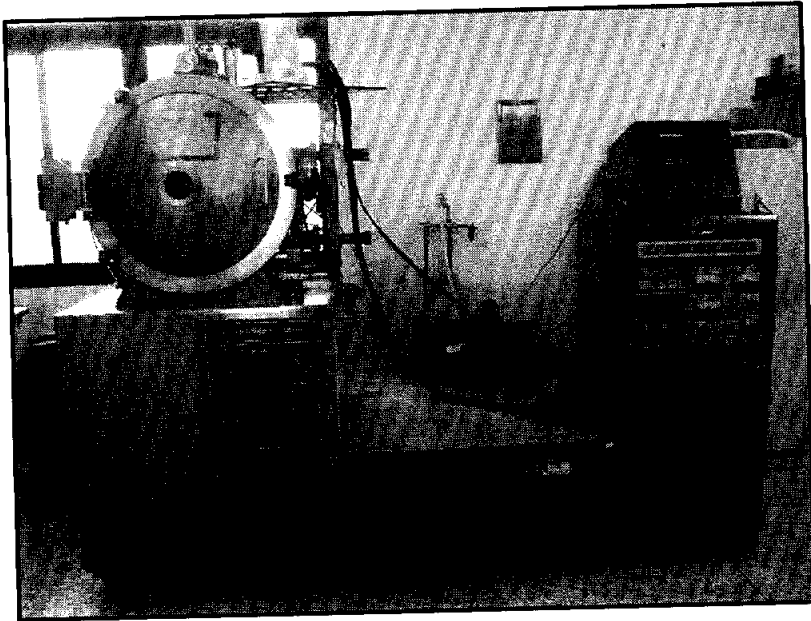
Apparatus of diffusion brazing included induction power and vacuum chamber
